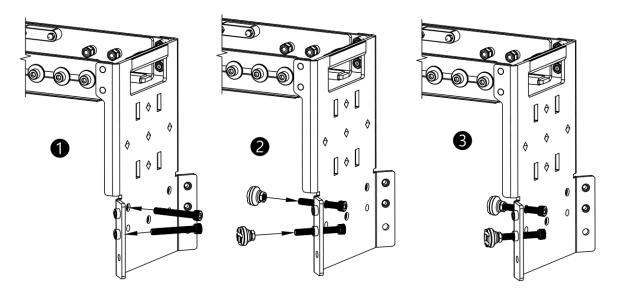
Installing the swivel feet: example of screw placement, attachment, and final assembly for both straight and corner configurations
